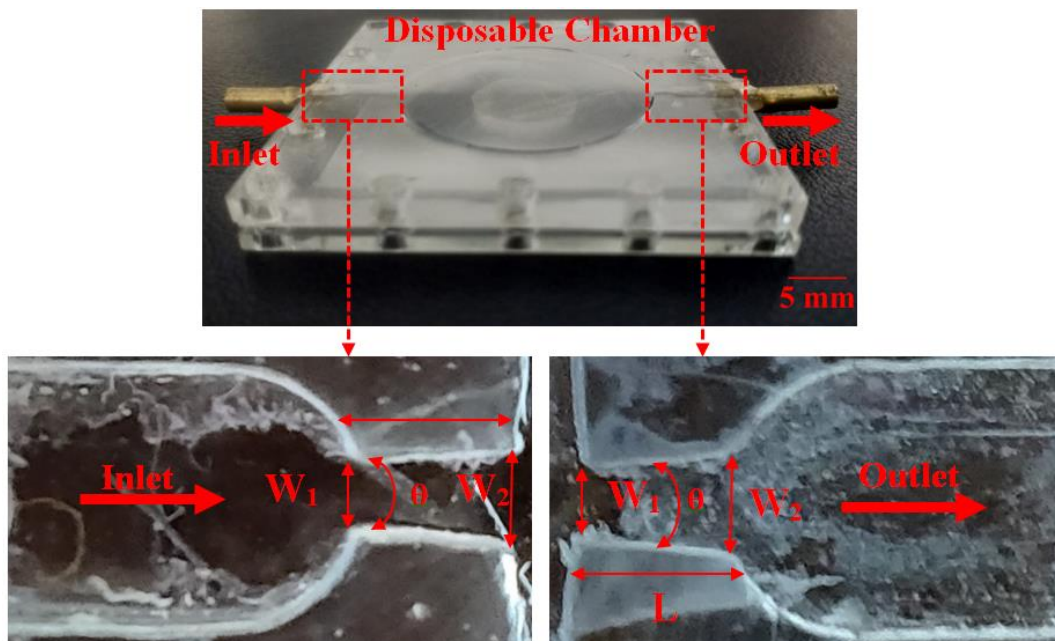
Photograph of the pump chamber taken in micro lens camera, having nozzle/diffuser manufactured using laser cutting process
